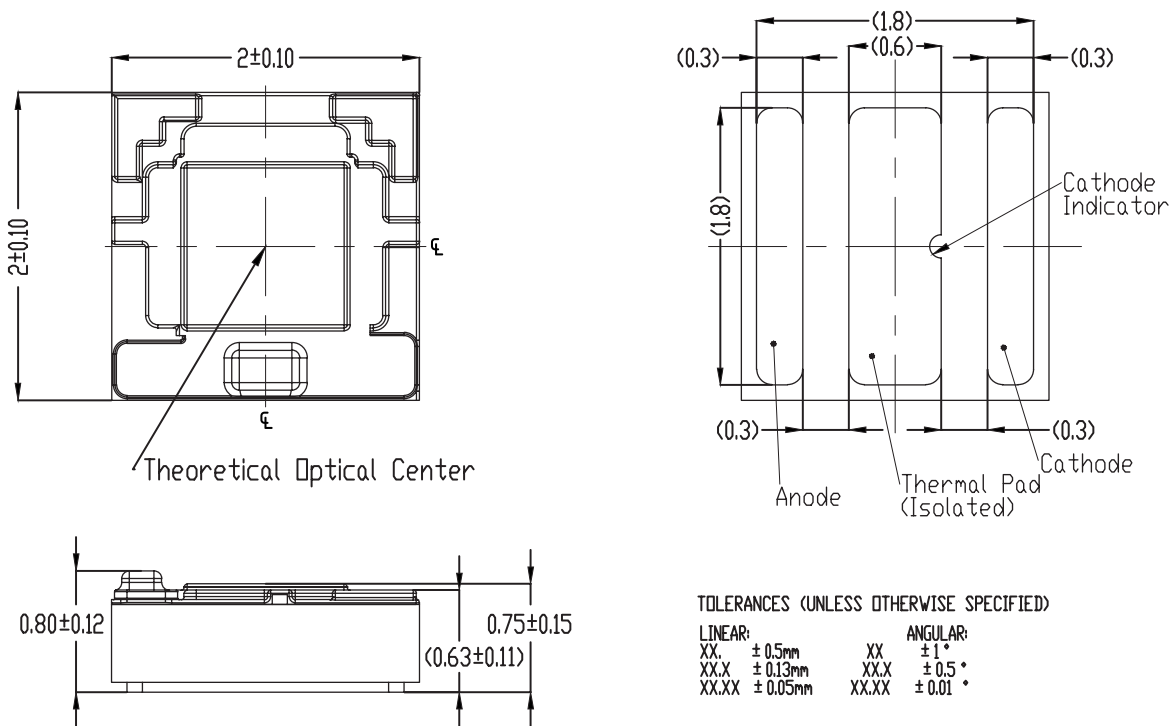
Mechanical dimensions for LUXEON CZ Color Line.
